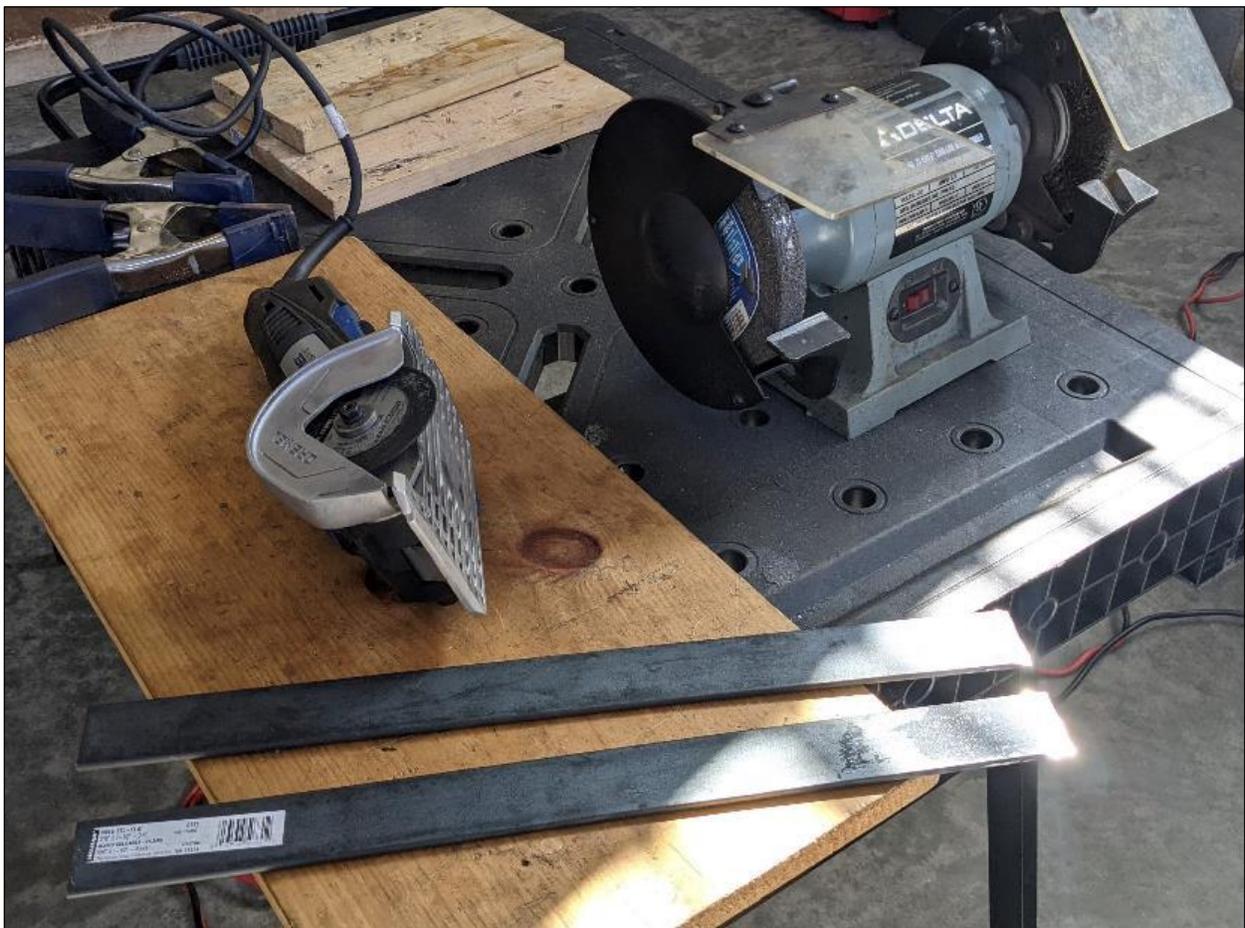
First Step, cut the 3/16-inch-thick x 1.5-inch-wide steel bar stock to 18-inch length and rough shape the point ends with a grinder.
